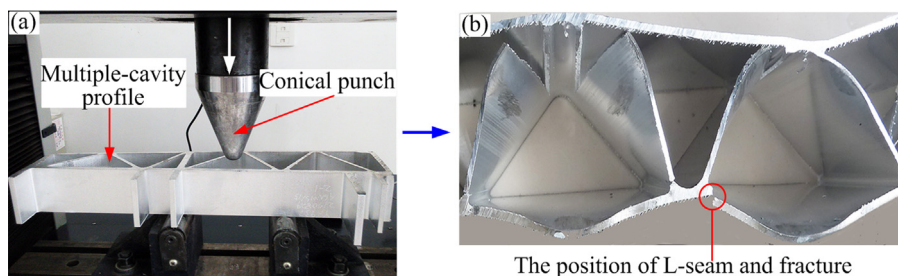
Burst test for a hollow section aluminum alloy profile: (a) test equipment, (b) fracture location.
